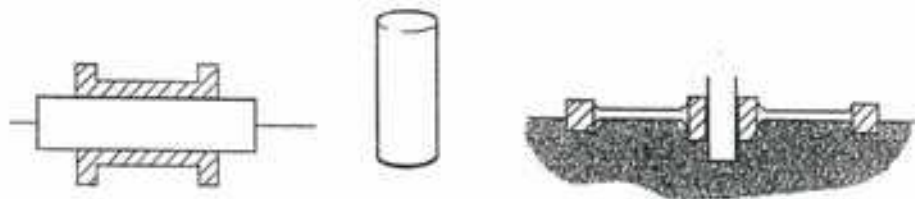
Hollow pattern cored, and cored pattern half embedded ready to make mould.
